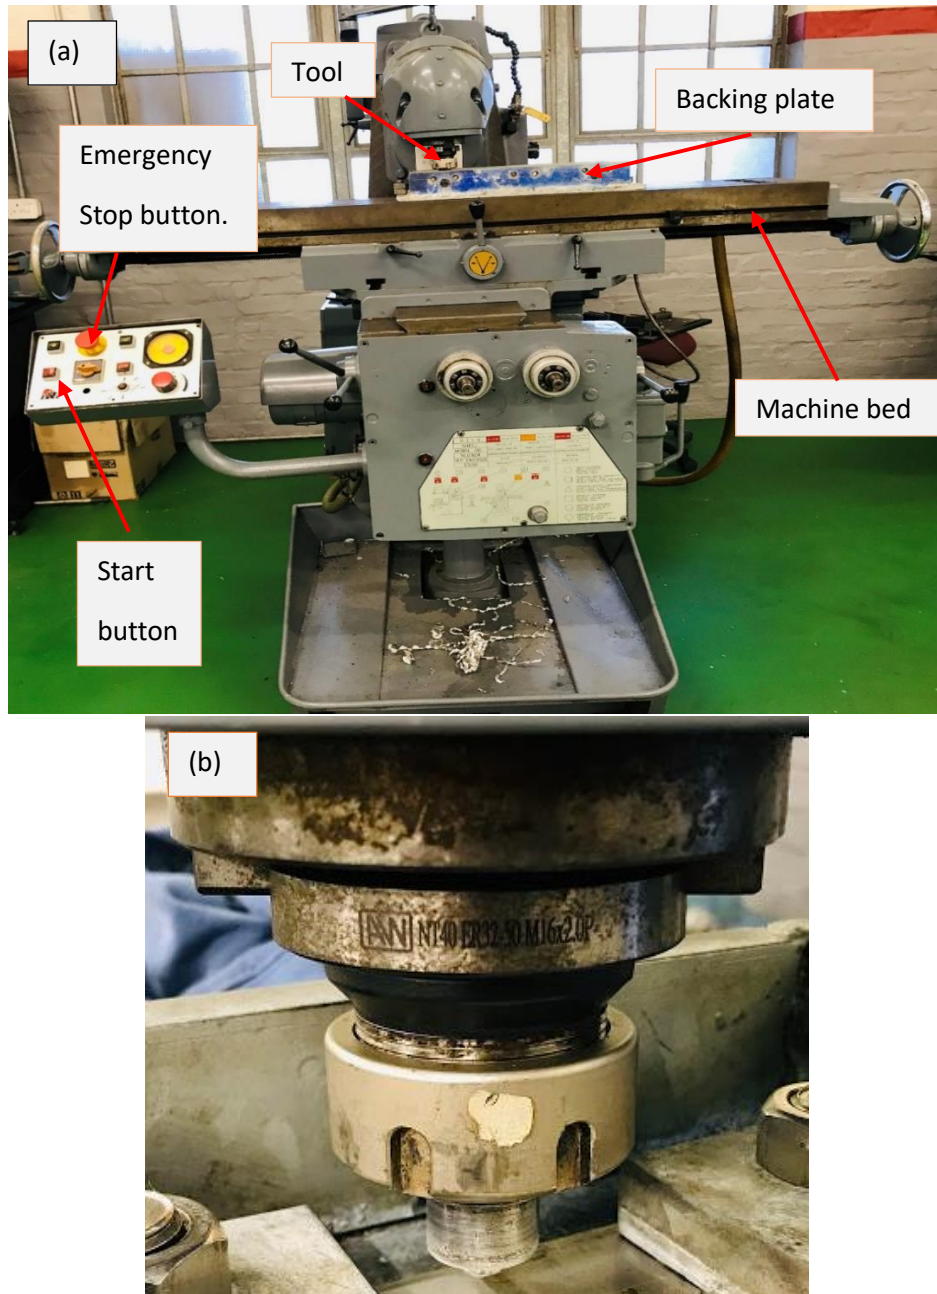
(a) Semi-automated milling machine, (b) FSW/FSP Tool.
